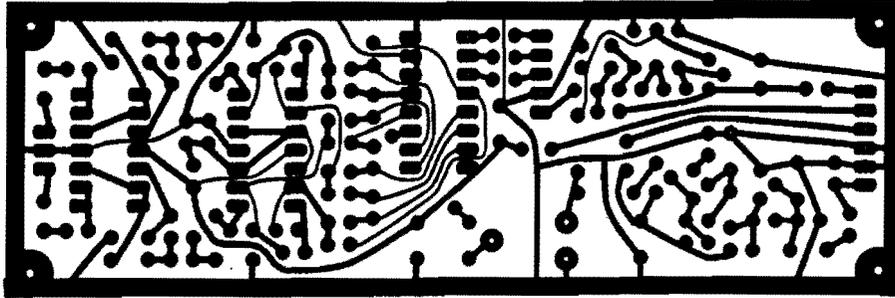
Modulator PCB (0.8mm single-sided FR4).
